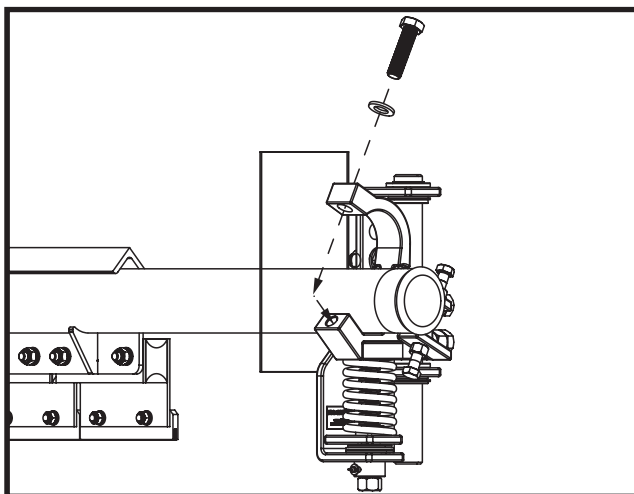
Martin® P2 Secondary Belt Cleaner HD
